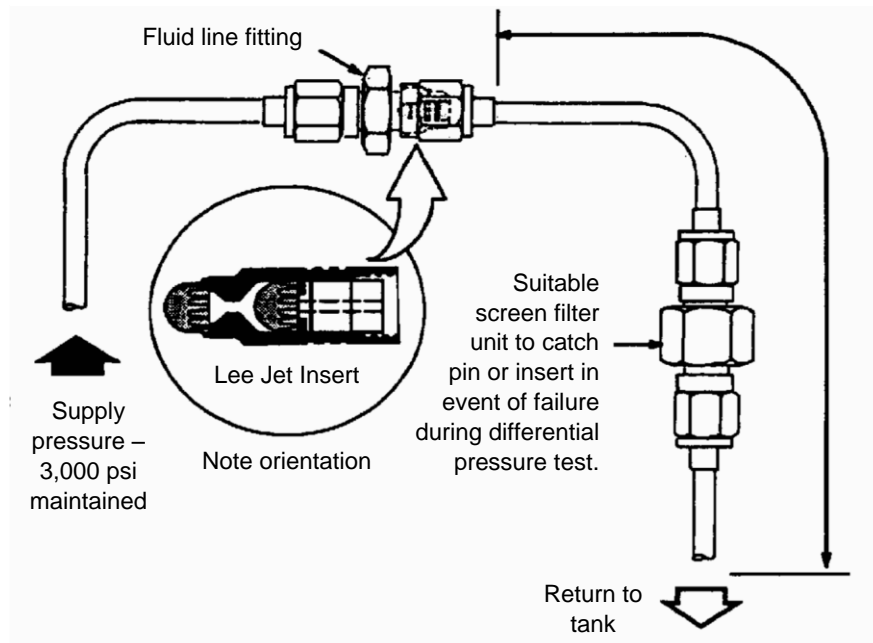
Pressure Testing Lee Jet Inserts in Fluid Line Fittings
